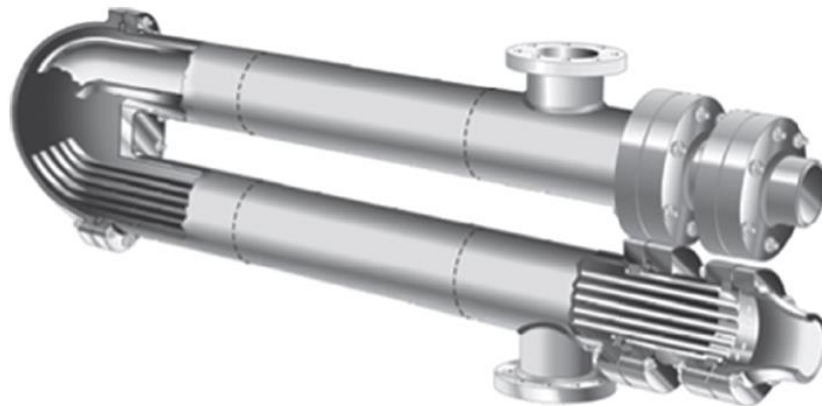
3D view of e tube in tube heat exchanger [2]
